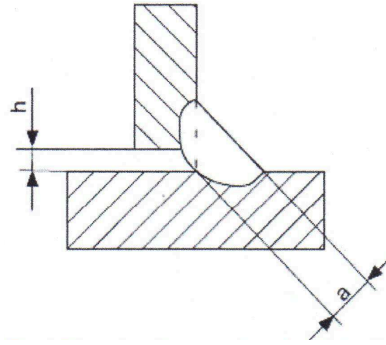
Illustration of weld size (a) and root gap (h) [9].
